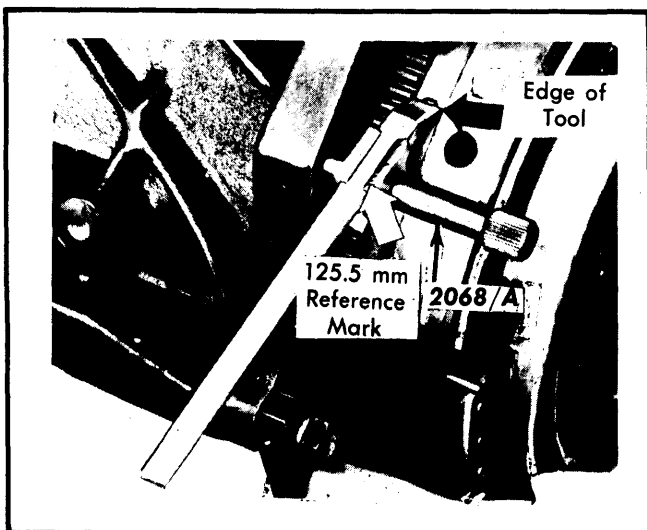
Adjusting No. 1 Cylinder to TDC With Engine Removed (Audi Shown)
